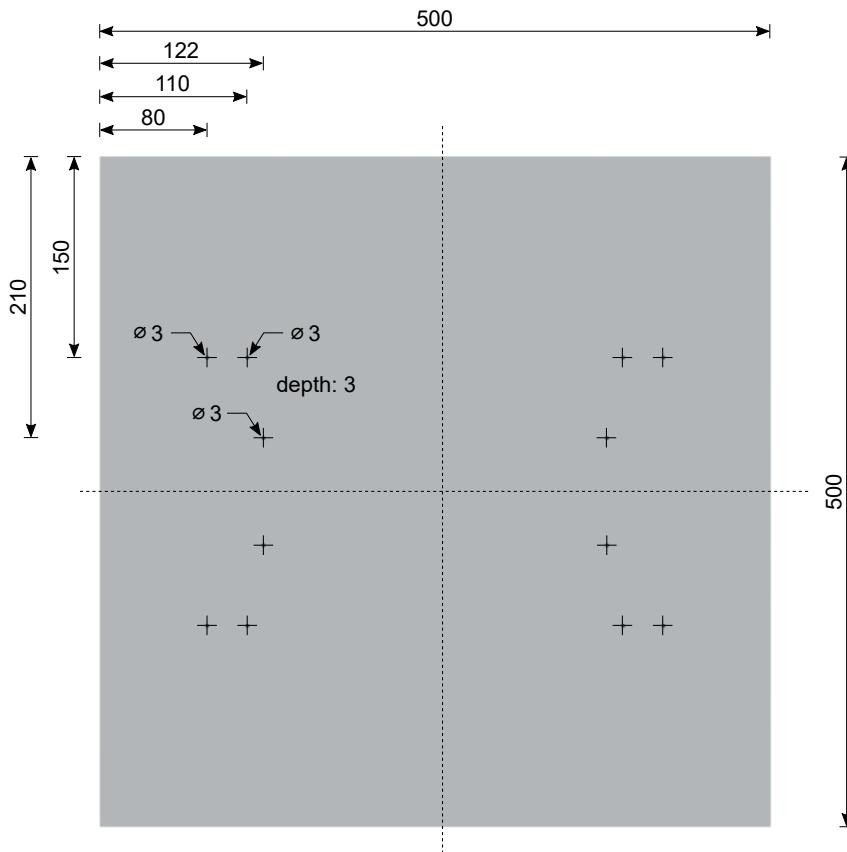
Drill pattern of wood 3 (bottom). The depth of the $\varnothing 3$ mm holes is 3 mm. Note: The color is grey to show the drill pattern better. All dimensions are in mm.
